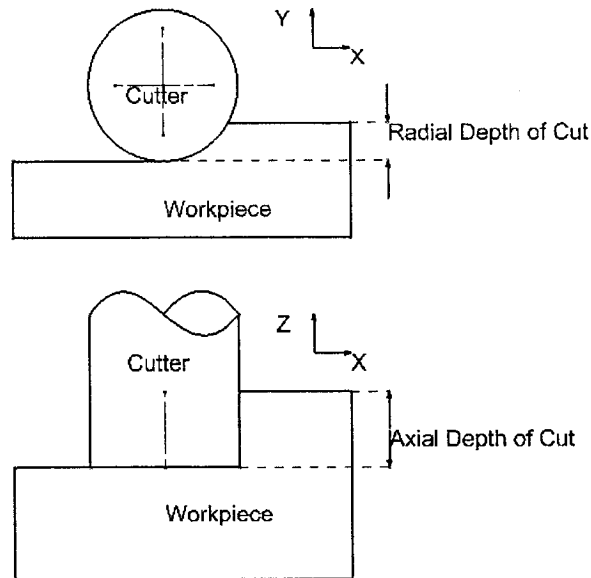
Radial Depth of Cut and Axial Depth of Cut
